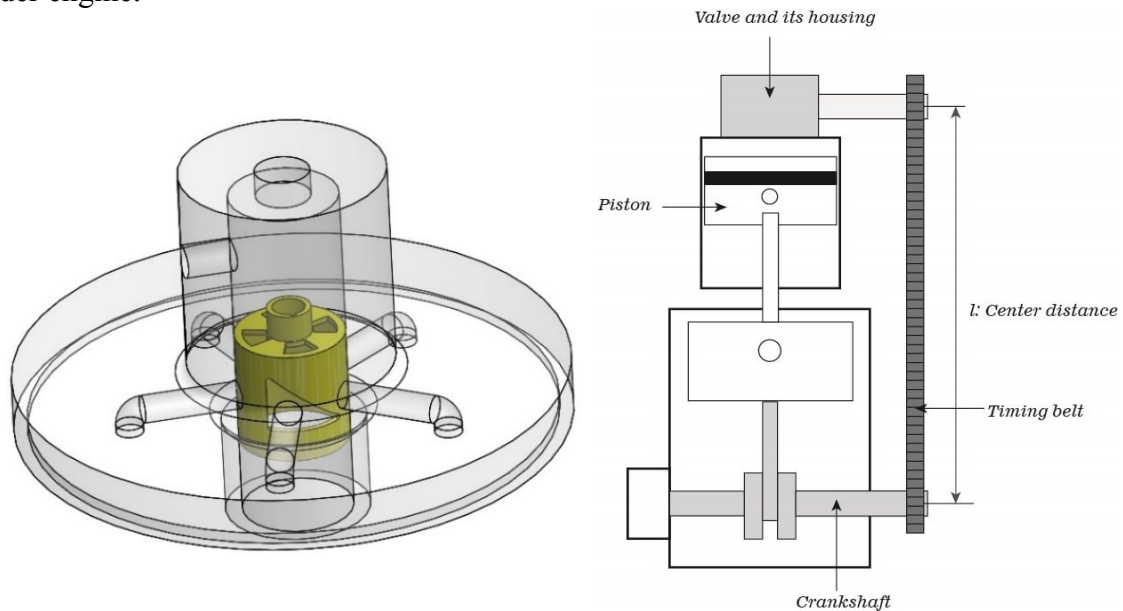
Illustration of the rotating valve in a multi-cylinder engine (left) and on a single-cylinder engine (right)
